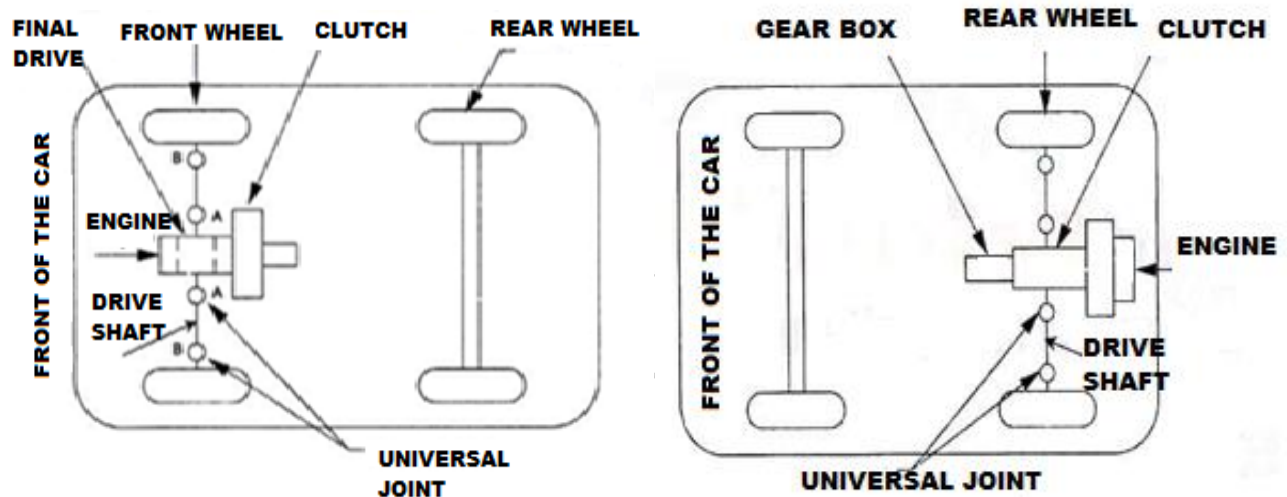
Front Engine Front Wheel Drive Fig.1.2 Rear Engine Rear Wheel Drive
